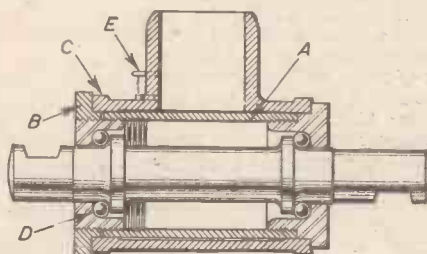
The oilbath bracket. A—sleeve, B—locking ring, C—body, D—cup, E—oil lubricator.
